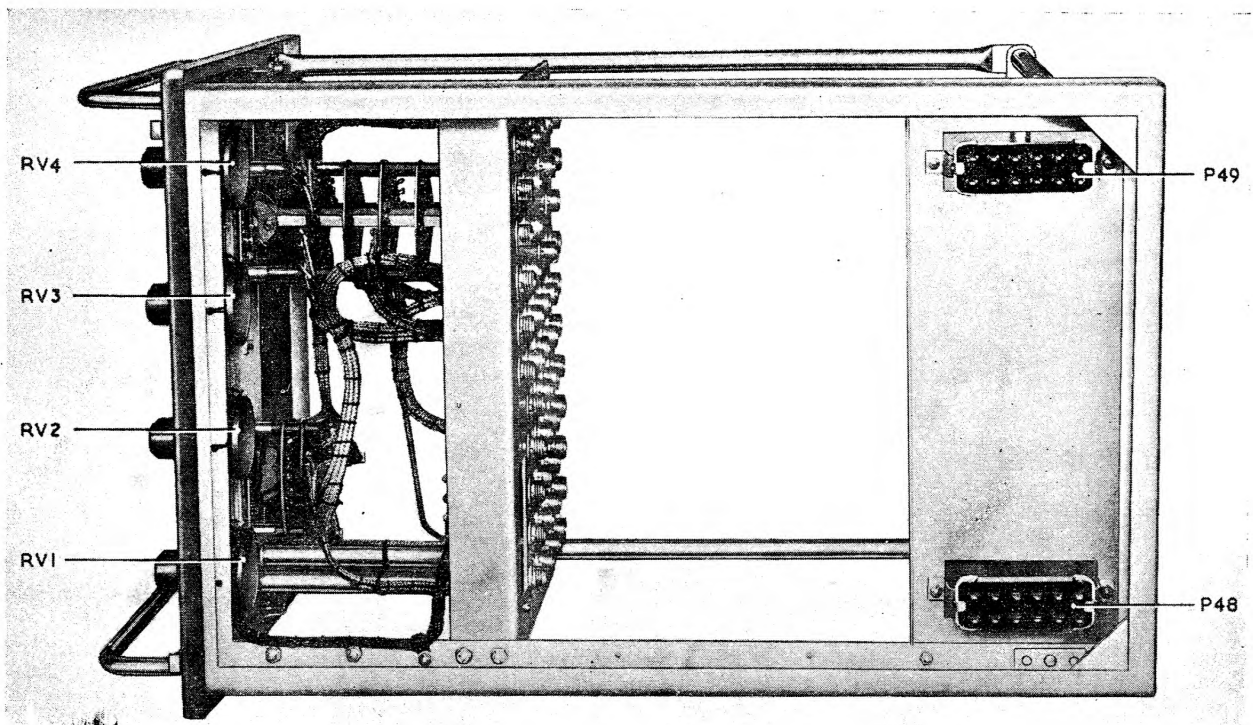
Switch unit (mon.) Type 296, chassis underside (1)
